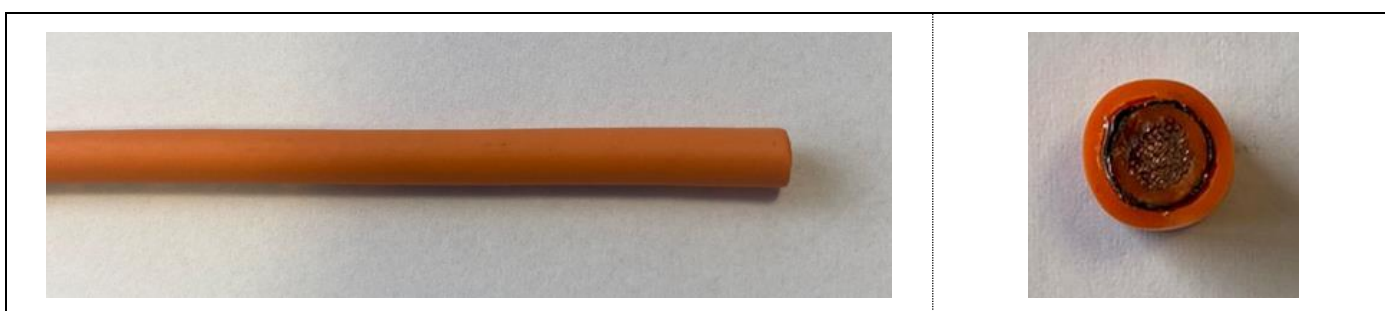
Representation 6.0 mm² SCC dimension X1 and dimension D15 (4.1 Cutting the cable)
